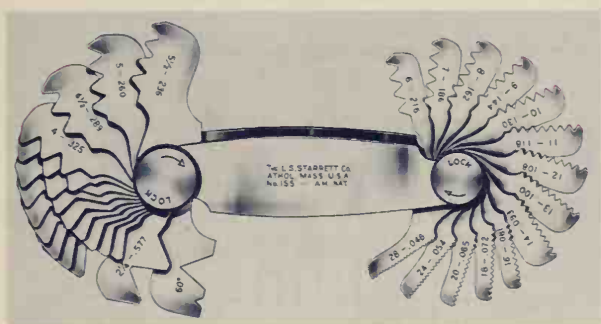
Reading screw thread gage (Courtesy The L.S. Starrett Co.)
